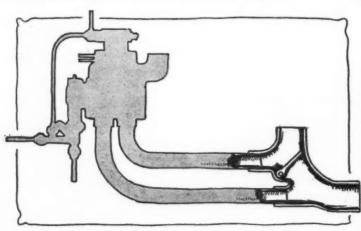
Diagrammatic layout of exhaust connection for heating fuel. In the position shown the valve is directing the exhaust gases through the carbureter. The valve is controlled from the dash
